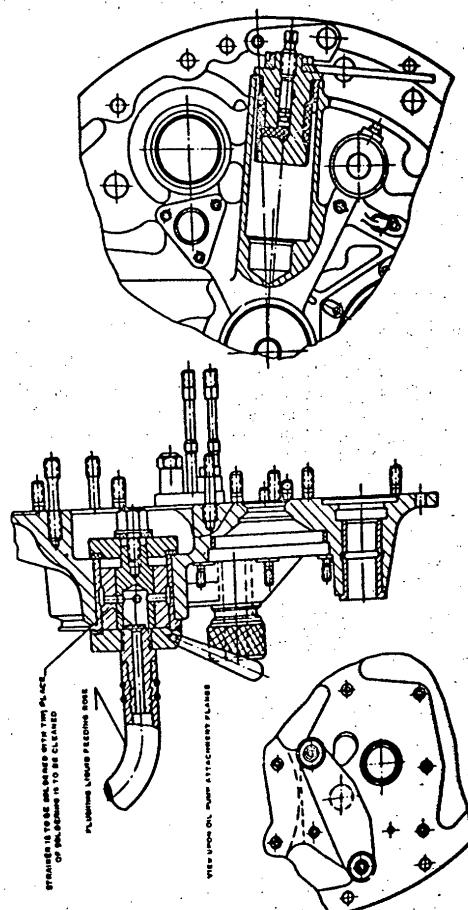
APPARATUS FOR FLUSHING OIL DUCTS OF CHASSIS AND REAR PLATE.
